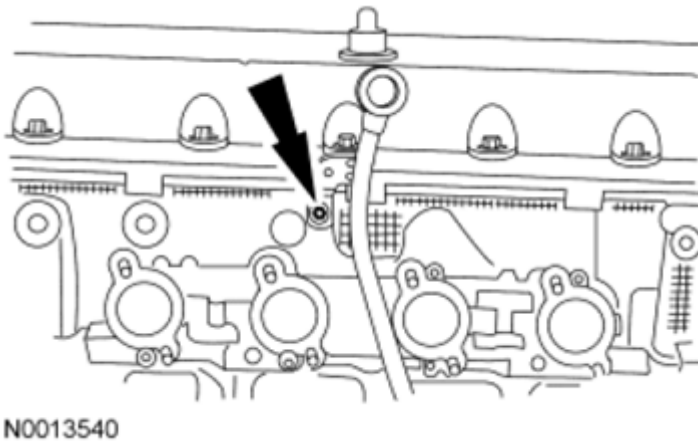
Identifying Cylinder Head Remover/Installer (303-572)
